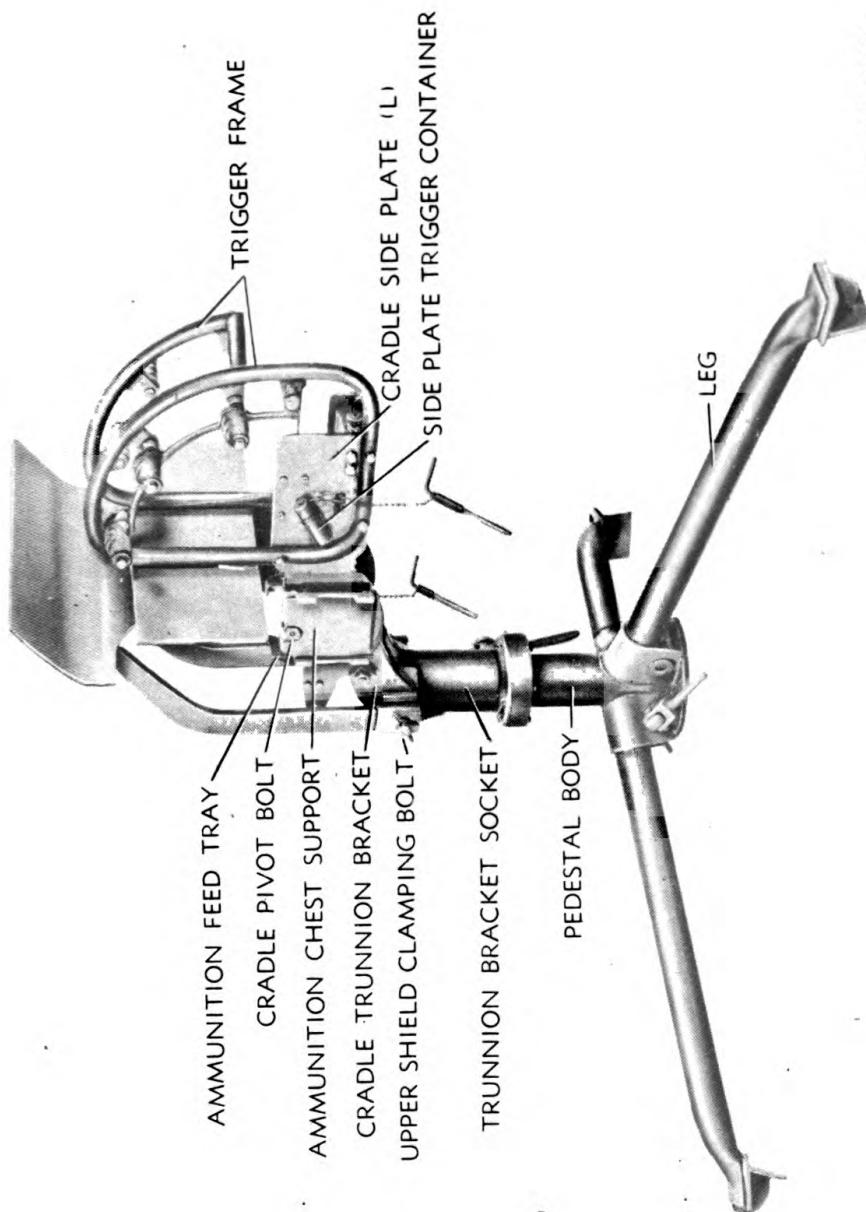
Right Side View — A.A. Machine Gun Mount, Cal. .50, M3
